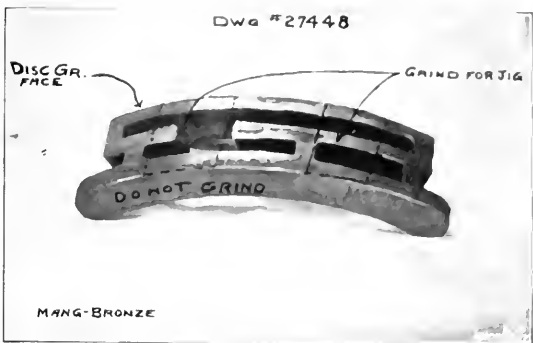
Surfaces subsequently machined, which are ground to meet the Requirements of the Jig
